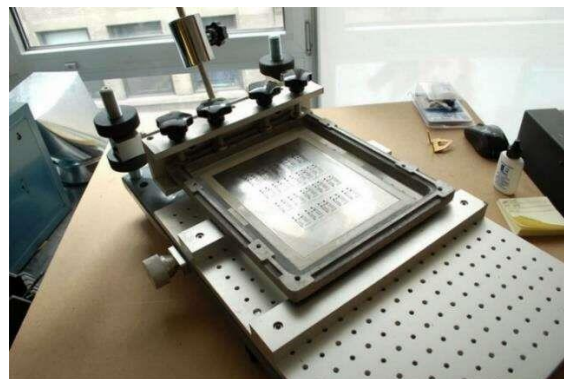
A framed stencil bolted on a screen-printing machine
